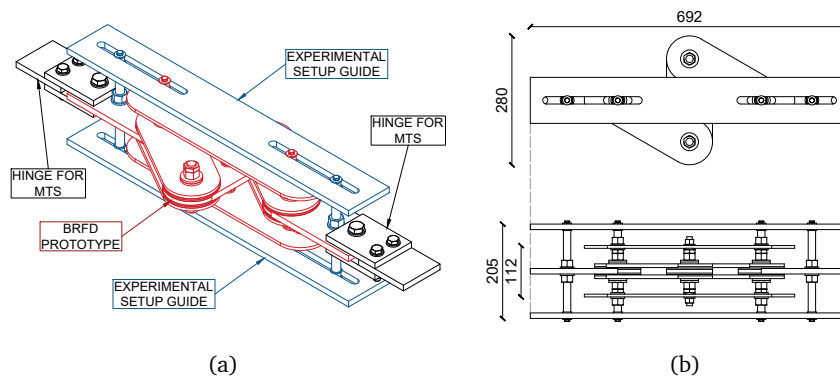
BRFD prototype drawings: a) axonometric view with details and b) top and side view. Dimensions in mm.
